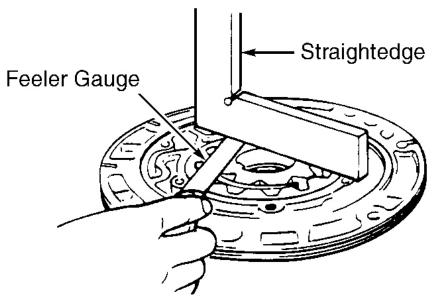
Checking Oil Pump Tip Clearance Courtesy of SUZUKI OF AMERICA CORP.
